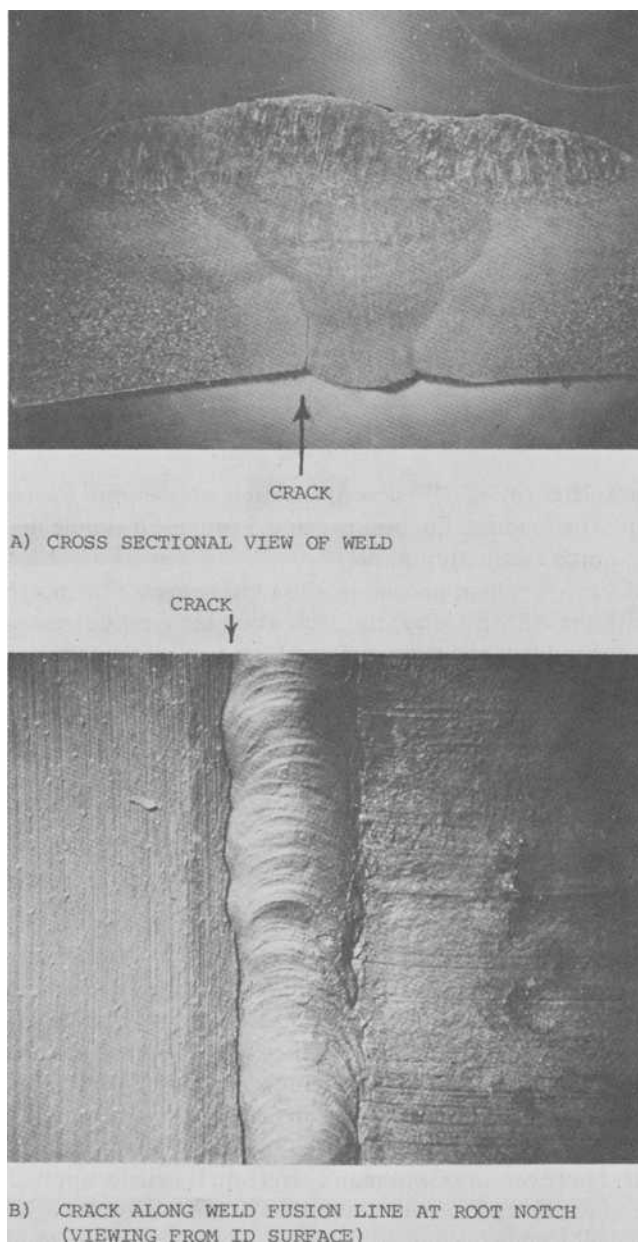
Cracks associated with weld root notch on the new weld prep design.
